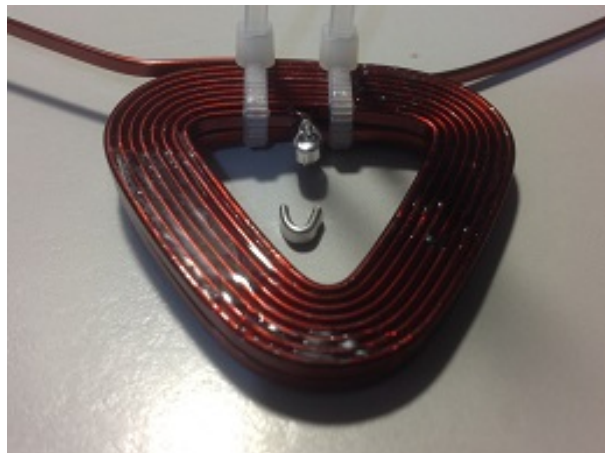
Two single layer coils joined together with inner conductors soldered and outer conductors available for external connection. A tinned clip made of ribbon wire used for soldered joints is also shown.
